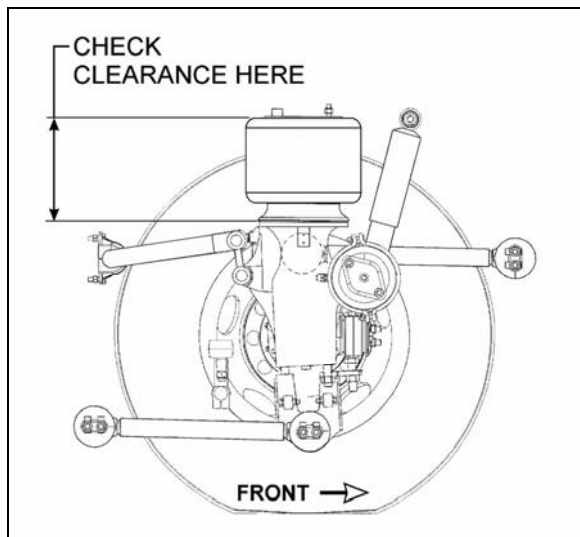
TYPICAL AIR SPRING CLEARANCE 16097
